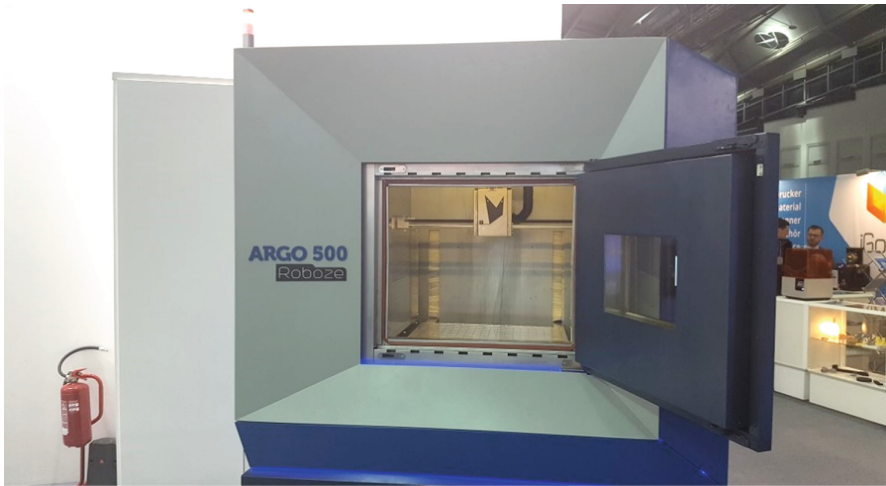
ARGO500 produced by Roboze. Source: <https://3dprint.com/194165/roboze-argo-500-3d-printer/> [34]
